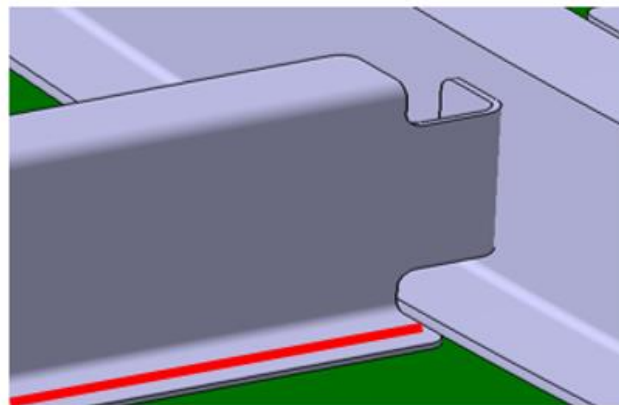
Schematic of a typical Z-profile stiffener welded against the skin. The weld is shown in red in the picture. Note that the position of FSSW would be in regular intervals along this line
